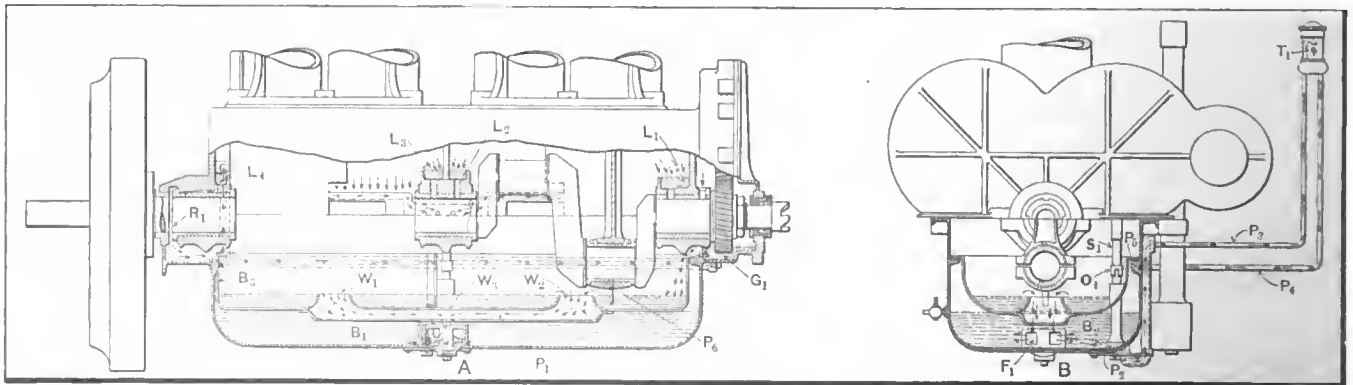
National, showing a section of the motor and method of lubrication, with a gear pump in bottom of case
